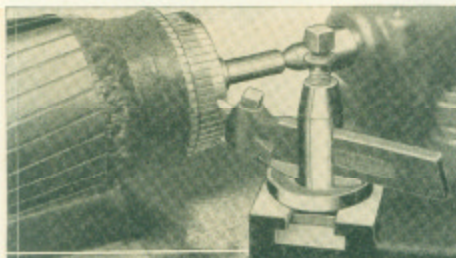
Taking the Finishing Cut to True the Commutator, in the Lathe
